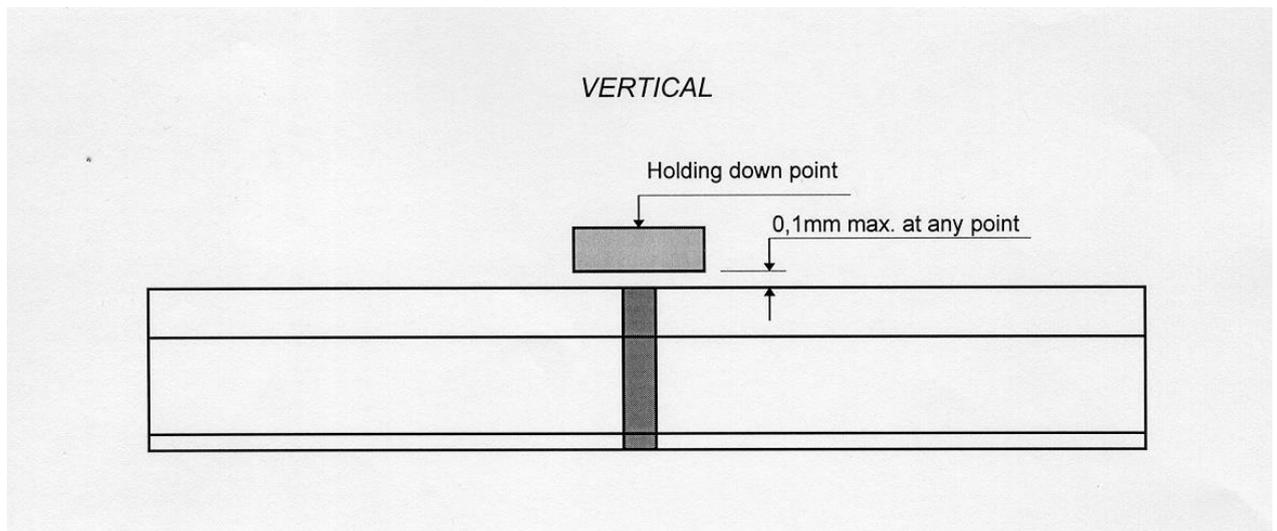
Straightness of flash butt joints after press and grinding using 100mm straight edge
